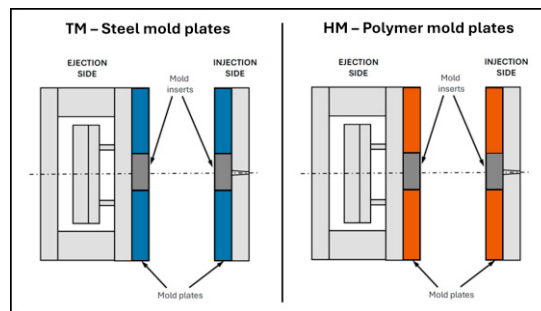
Schematic section of two setups: TM with steel mold plates; HM with polymer mold plates.
